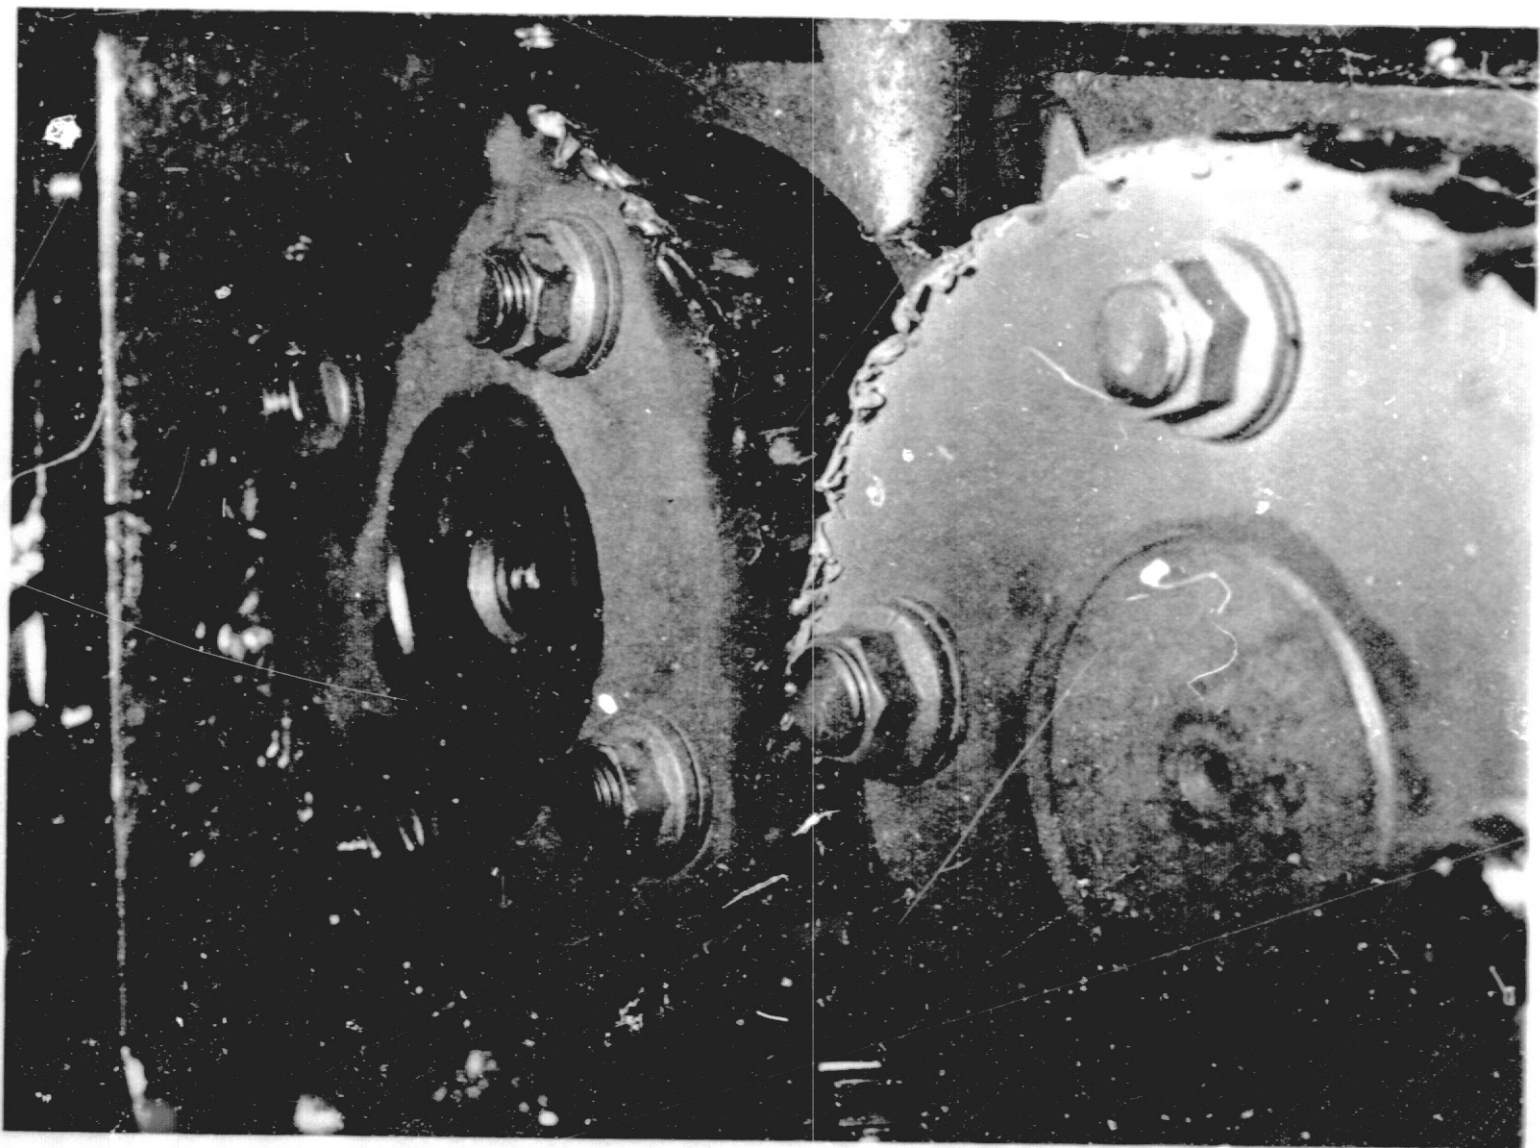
LEFT SIDE GEAR SET - STEP SPEED TESTING AT 20,000 rpm
